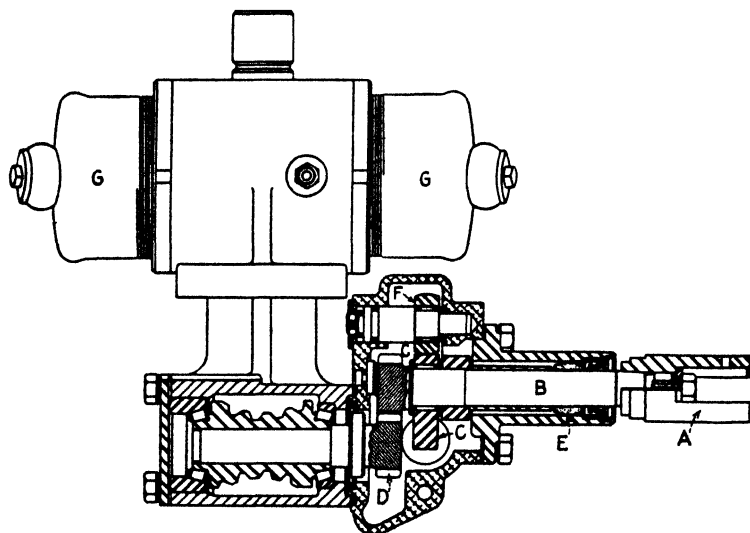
GEMMER HYDRAGUIDE, SECTION THROUGH WORM AXIS.
